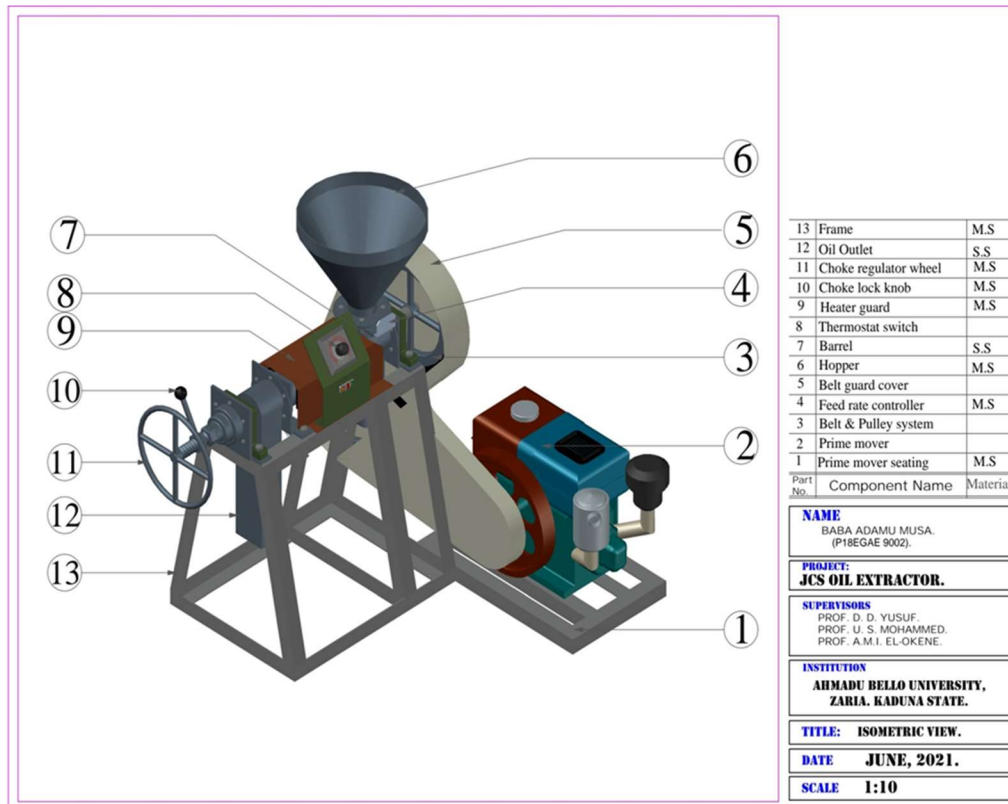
Assembled view of the jatropha oil mechanical extraction machine
